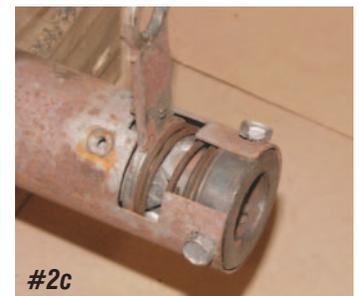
& 2b & 2c & 2d & 2e: The mast jacket may be removed from the car as an assembly. For a "how-to" on the mast jacket refer to the instructions for part 53-22 or 53-23 at www.classicchevy.com. With the top half of the mast jacket disassembled we can now move to the bottom end. Remove the shifter detent which is held to the mast jacket with two small bolts. Next remove the three larger bolts that hold the lower bushing into the bottom of the mast jacket tube. Remove the large spring and the shift tube from the mast jacket.
